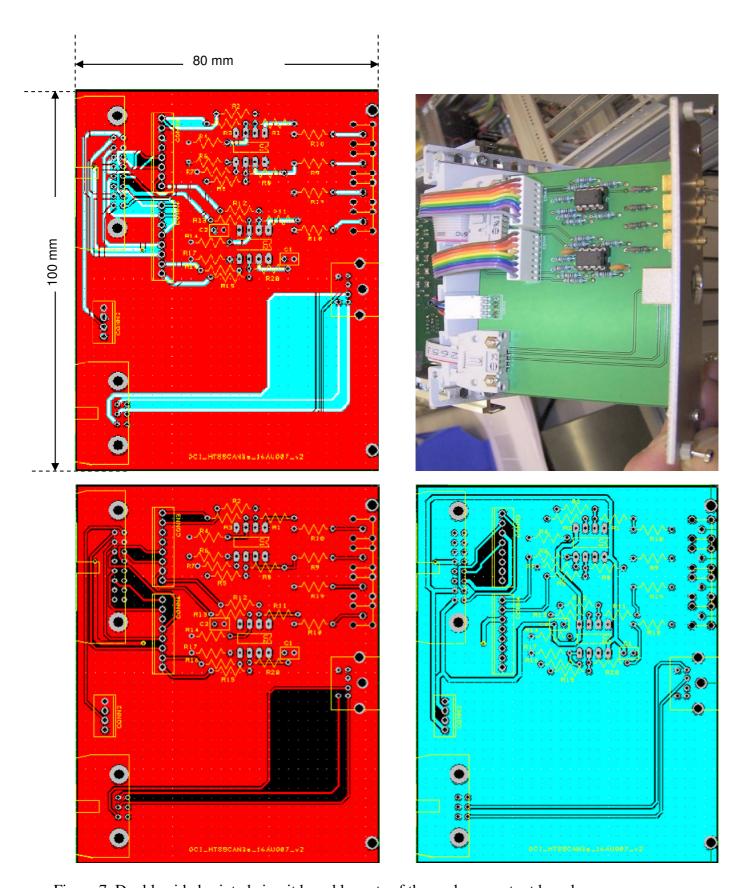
Double-sided printed circuit board layouts of the analogue output board.
